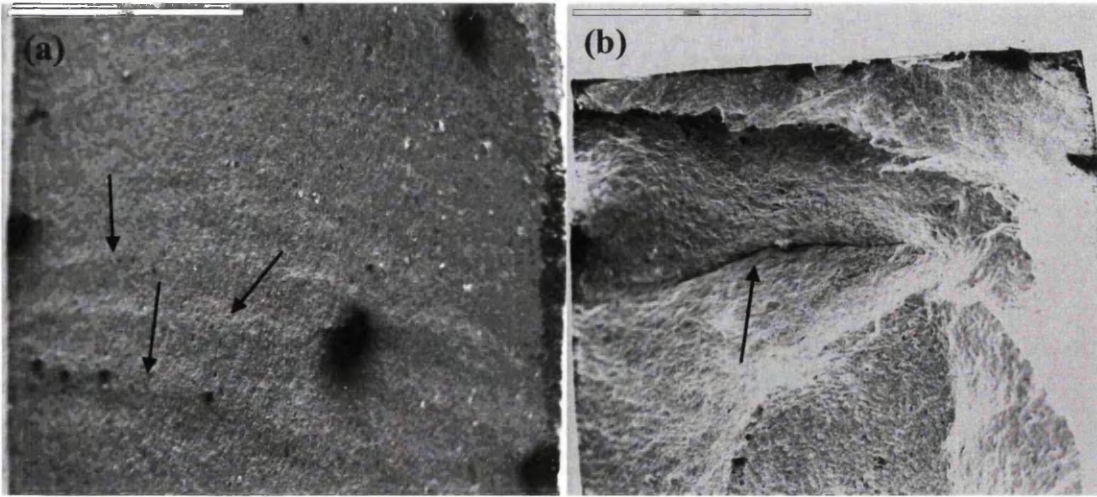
(a) Beach marks typical of fatigue and (b) secondary crack in the fracture surface of U720Li fatigue specimen.
